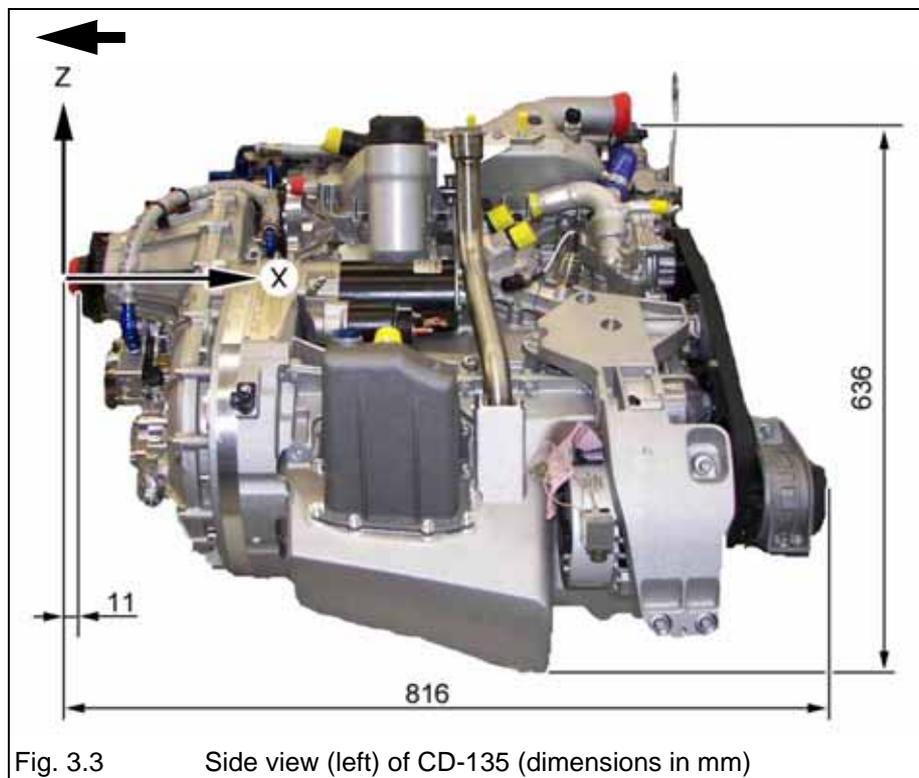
Side view (left) of CD-135 (dimensions in mm)
